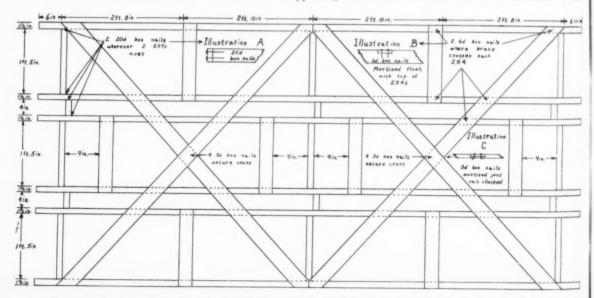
Top View of 6x12-Foot Collapsible Greenhouse Table Designed to Hold 27 Flats for Rooting Plants
